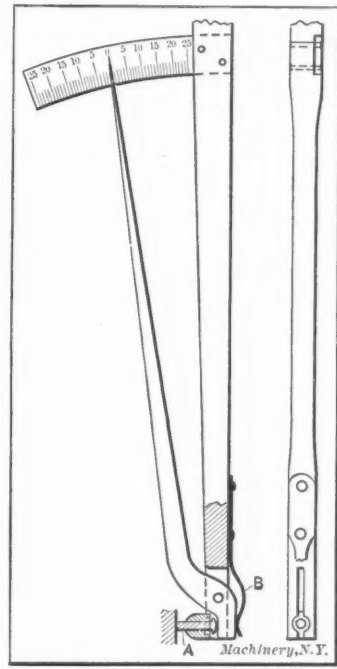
Detail of the Inside Caliper Indicator Attachment
